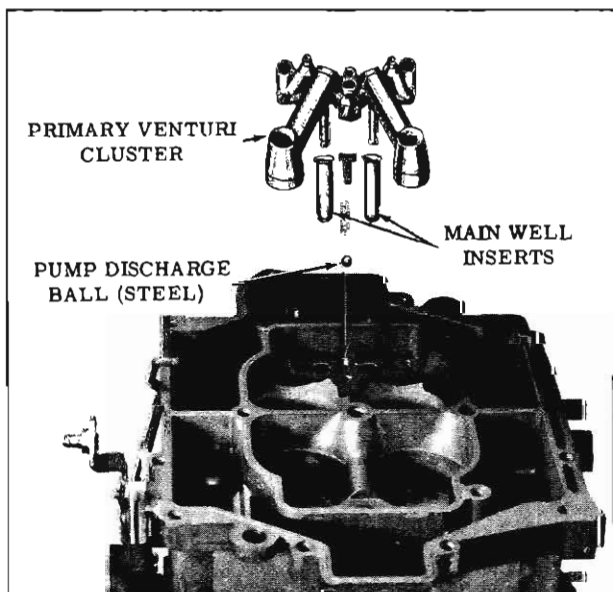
Pump Discharge Spring, Guide and Main Well Inserts
